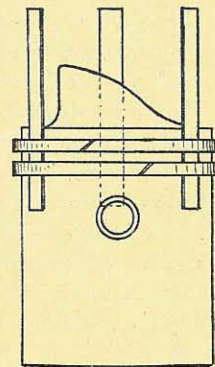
METHOD OF REMOVING PISTON-RINGS.
